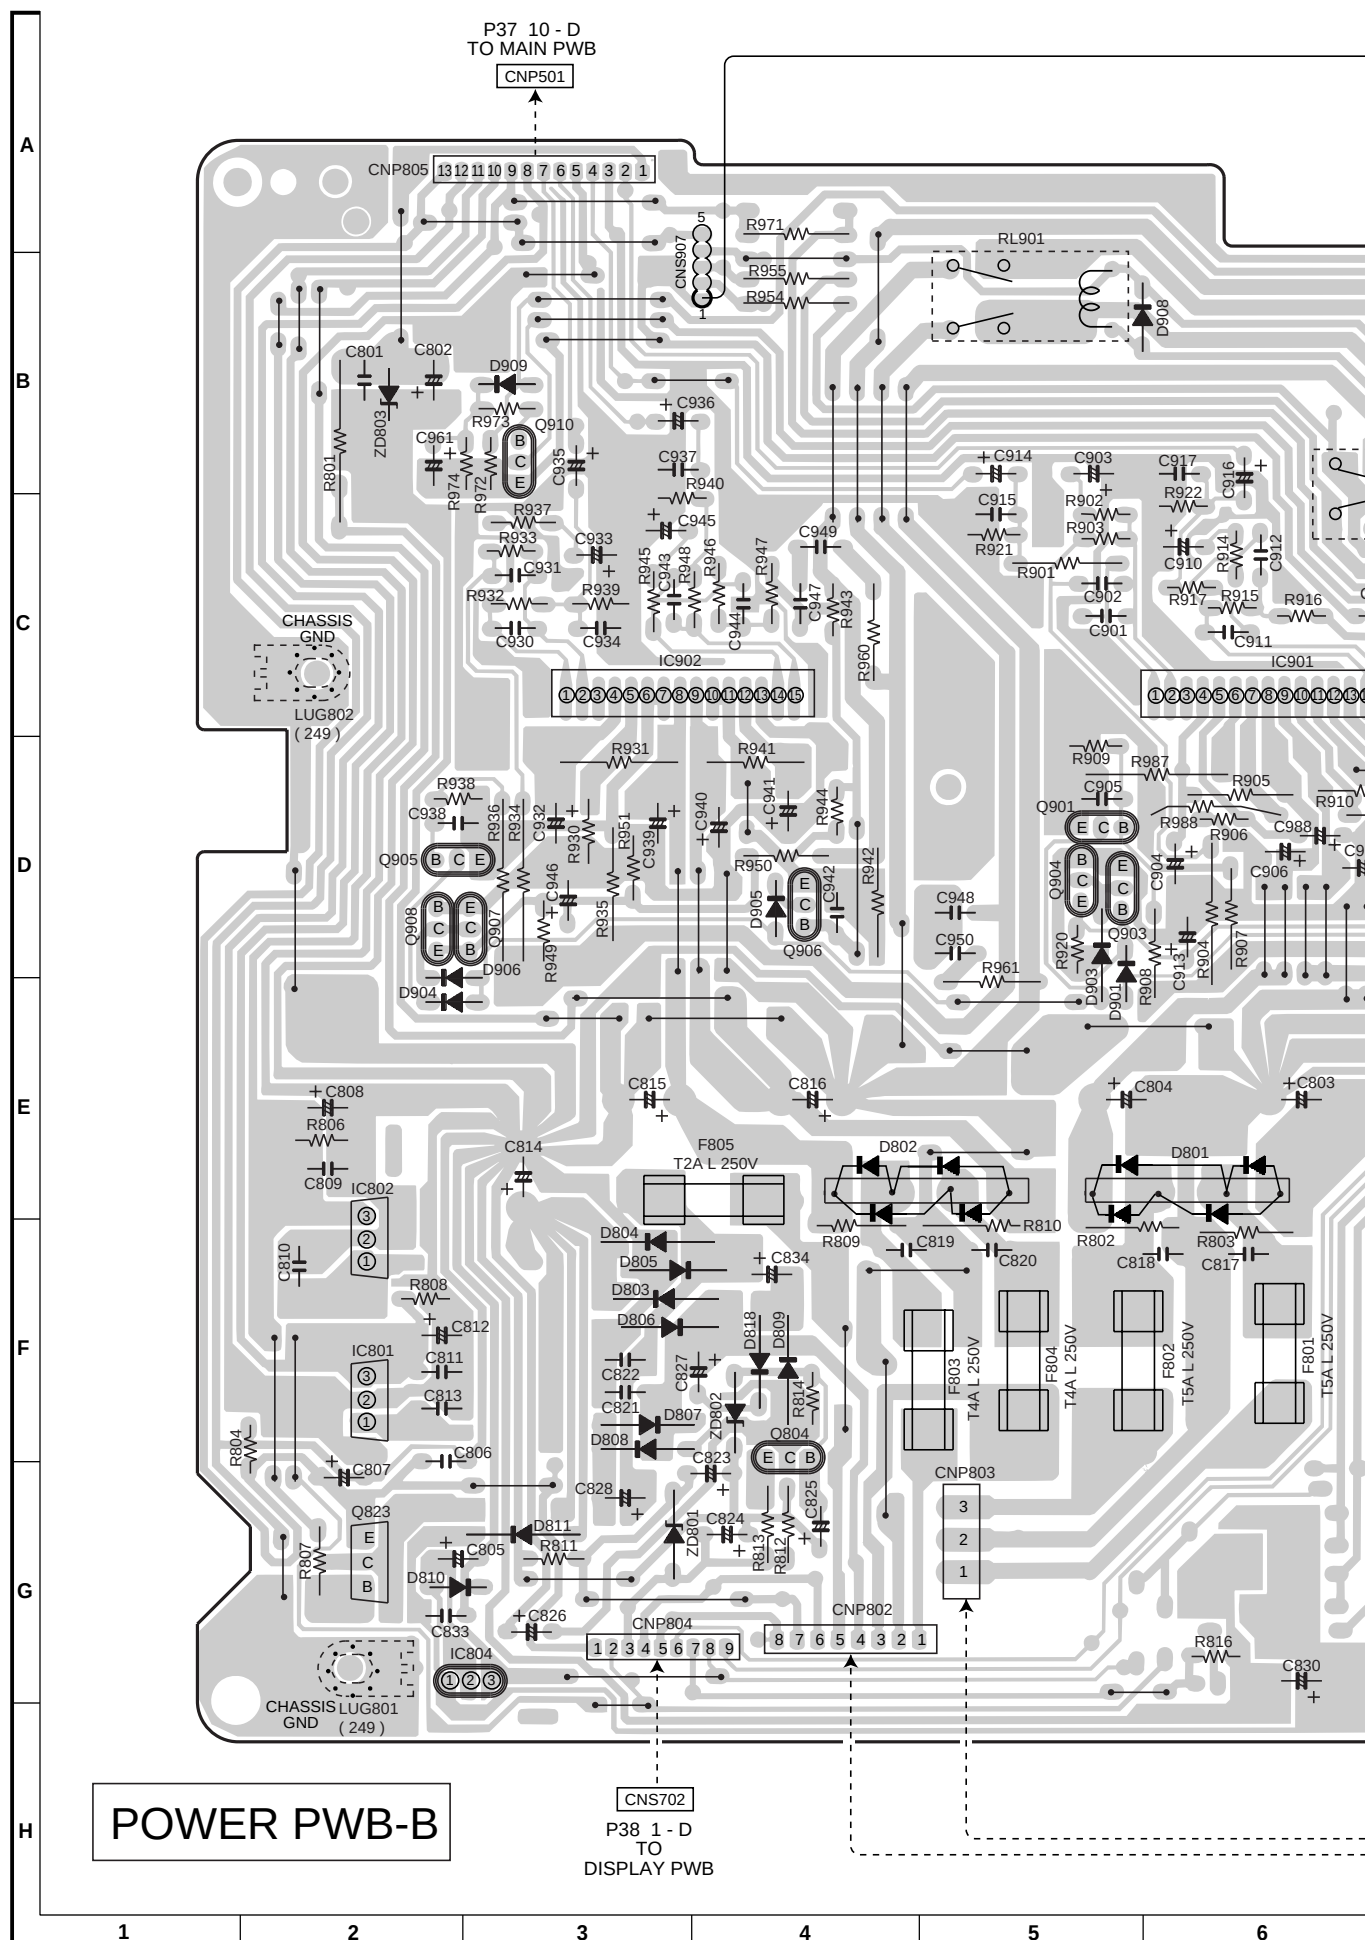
WIRING SIDE OF P.W.BOARD (6/9)
